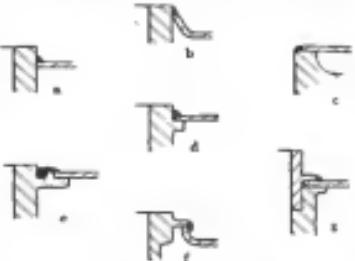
Welded joints employed for attaching the Water Jackets to the Cylinder Head and Valve Port Flanges
